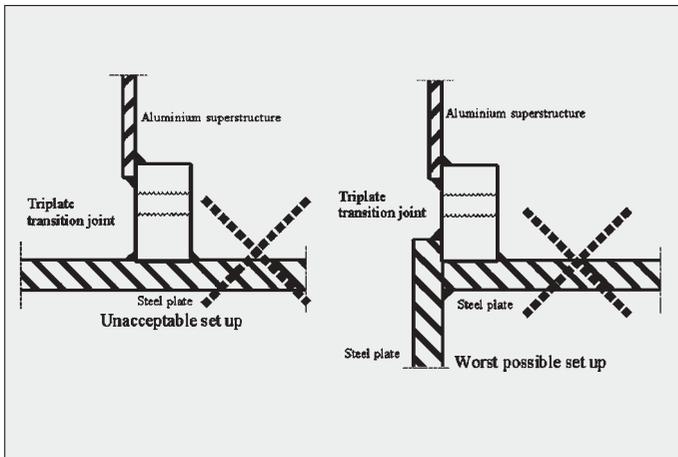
Welding configurations such as illustrated should be avoided
